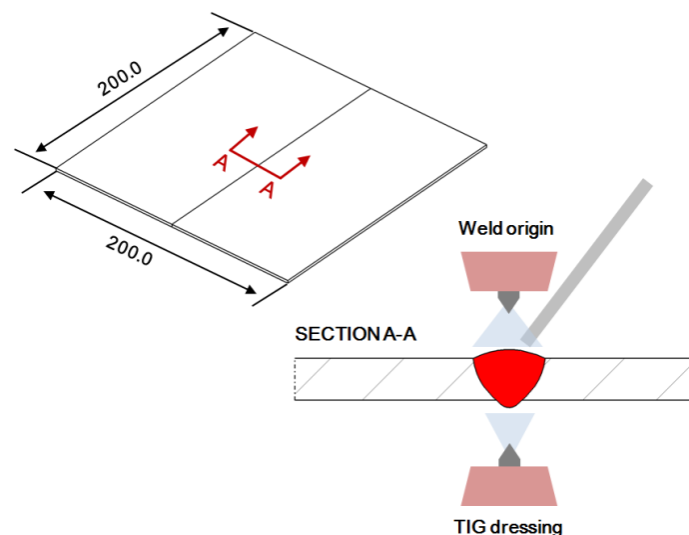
Illustration of welding test of Ti-3Al-2.5V and tungsten inert gas (TIG) dressing.
